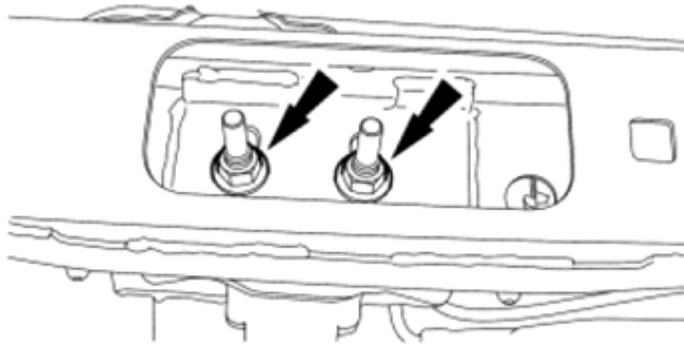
Locating Lower Transmission-To-Engine Bolts
